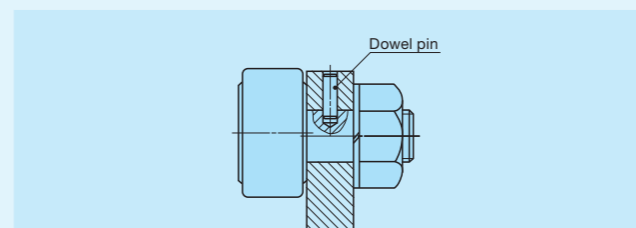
Mounting examples of Solid Eccentric Stud Type Cam Followers
